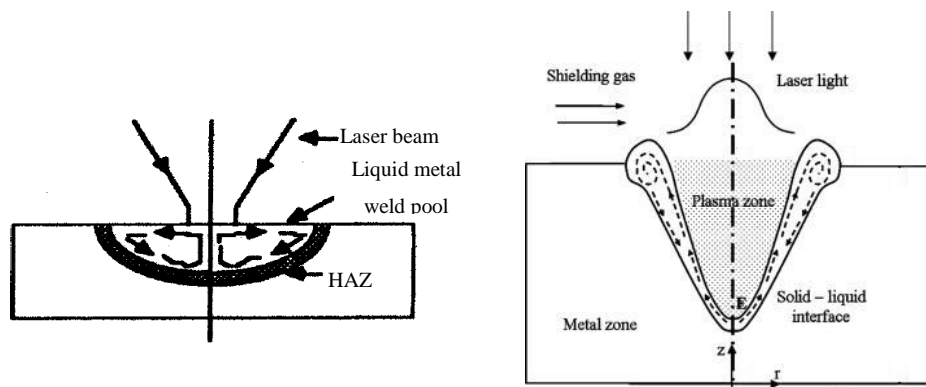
Conduction-limited welding (on the left) [8] and keyhole welding (on the right) [18].
